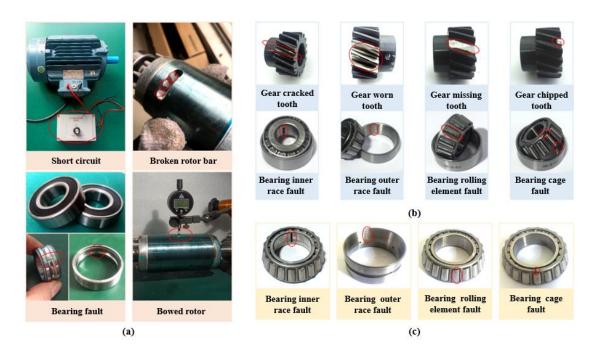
Photographs of fault simulations. (a) Motor. (b) Gearbox. (c) Axle box
